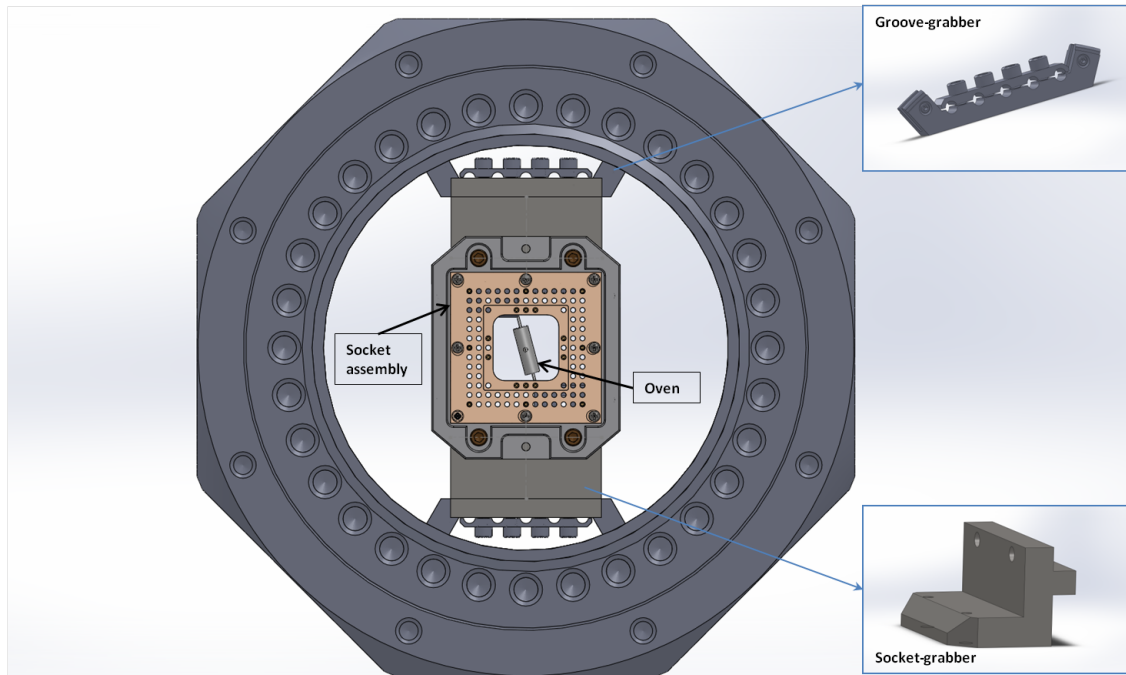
3D CAD drawings of the front side of the chamber and the parts inside the chamber such as oven, socket assembly, groove-grabber, and socket-grabber.
